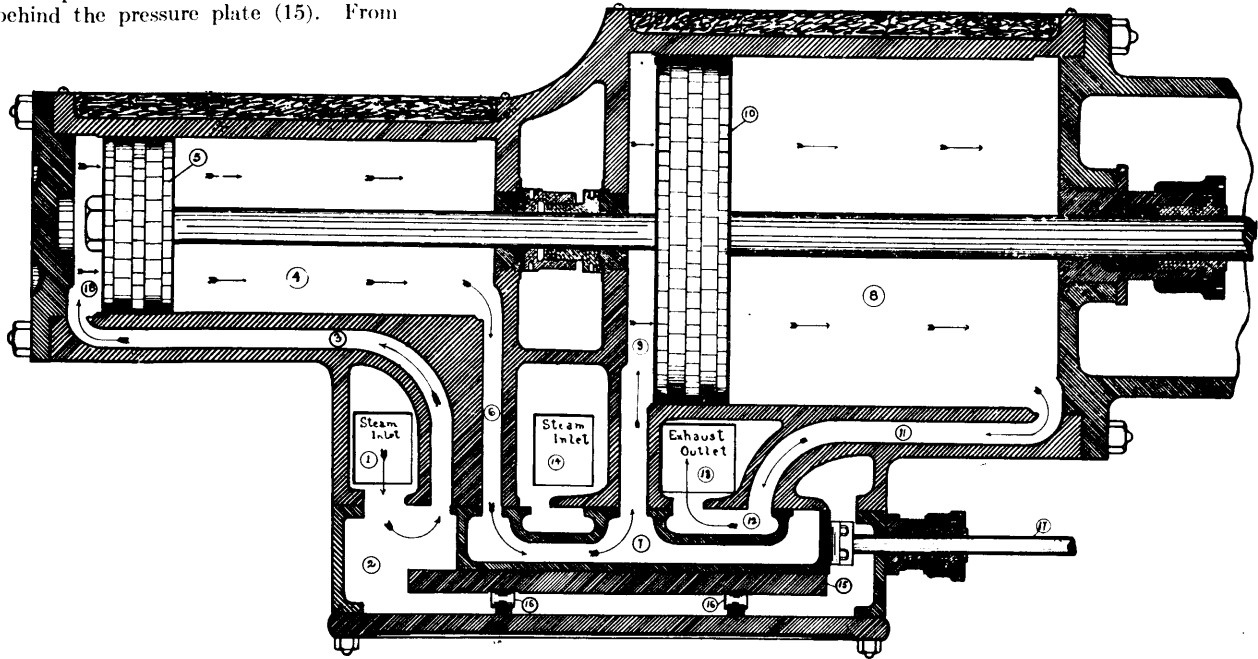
SECTIONAL VIEW OF CYLINDERS, STEAM CHEST AND VALVE HARDILL ENGINE.
